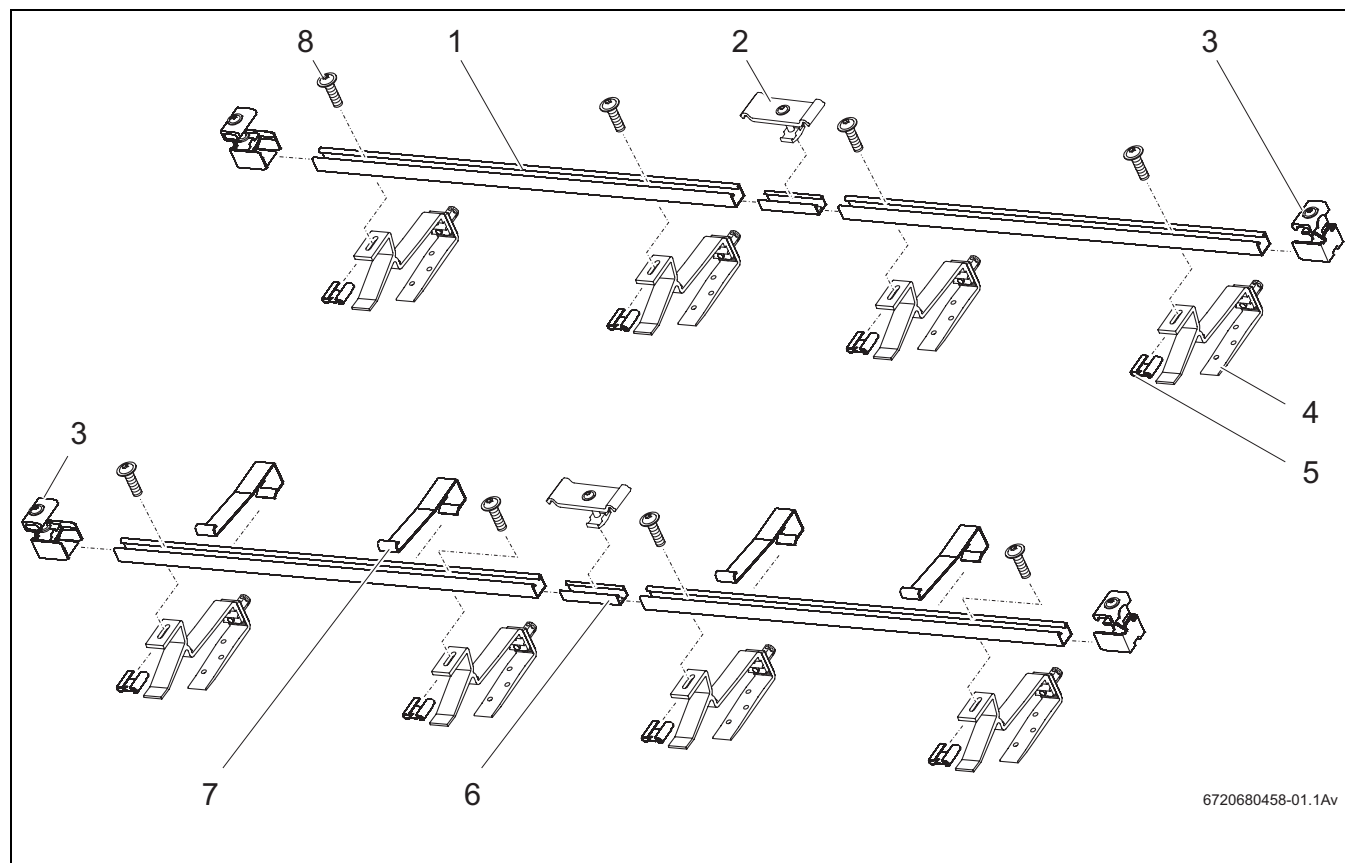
Installation set for 2 collectors – 1 standard installation set, 1 extension installation set and 2 roof hook installation sets to fix to rooftop
